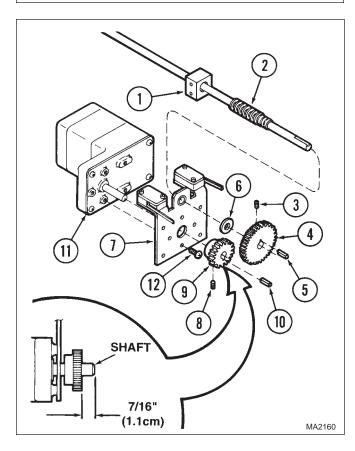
Lateral Tilt Drive Assembly Assembly
